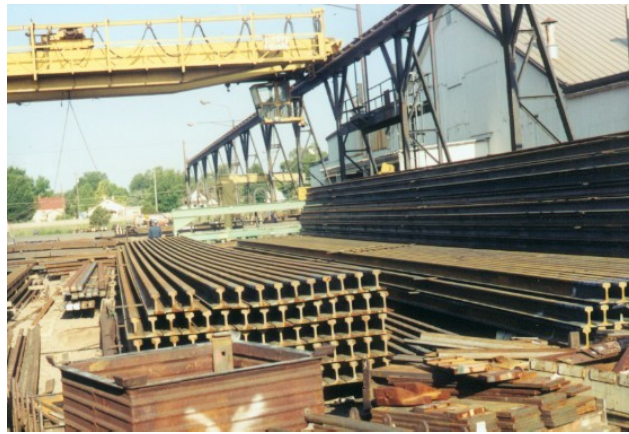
40' and 80' Rail Stocks at the Facility 1
